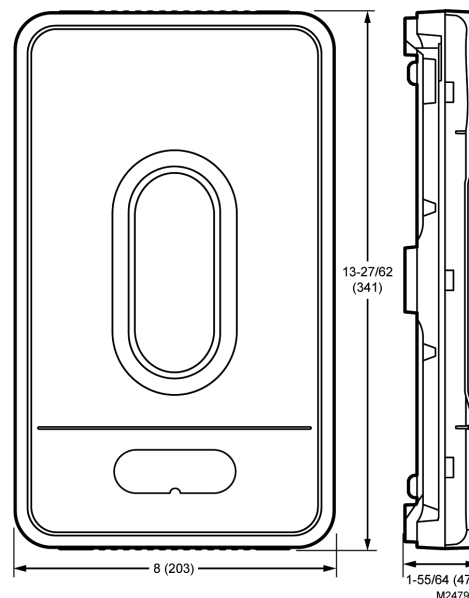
HZ432 TrueZONE panel dimensions in in. (mm).
